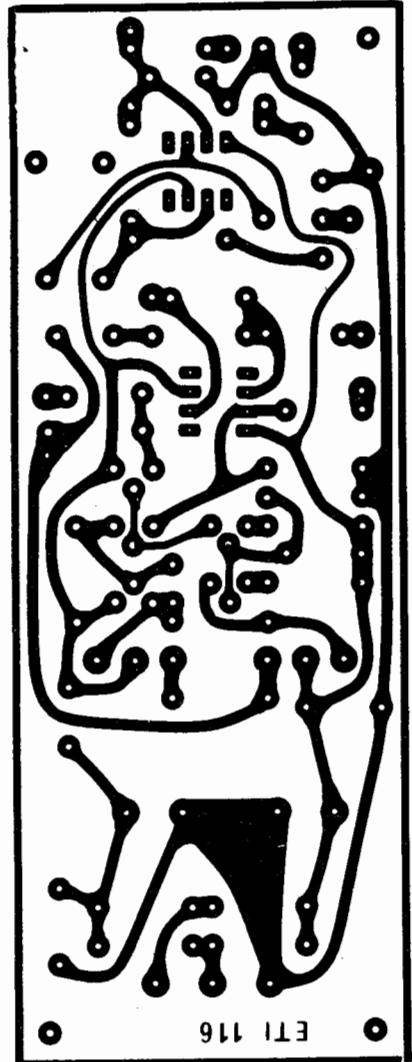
Printed circuit board layout. Full size, 140 x 62 mm.
